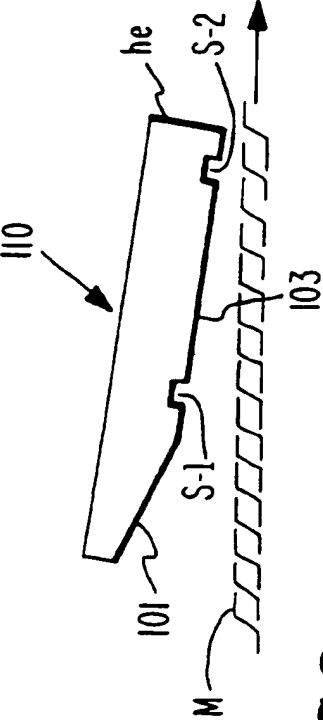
MODIFIED 3680 SLIDER FOR BURNISHING.
